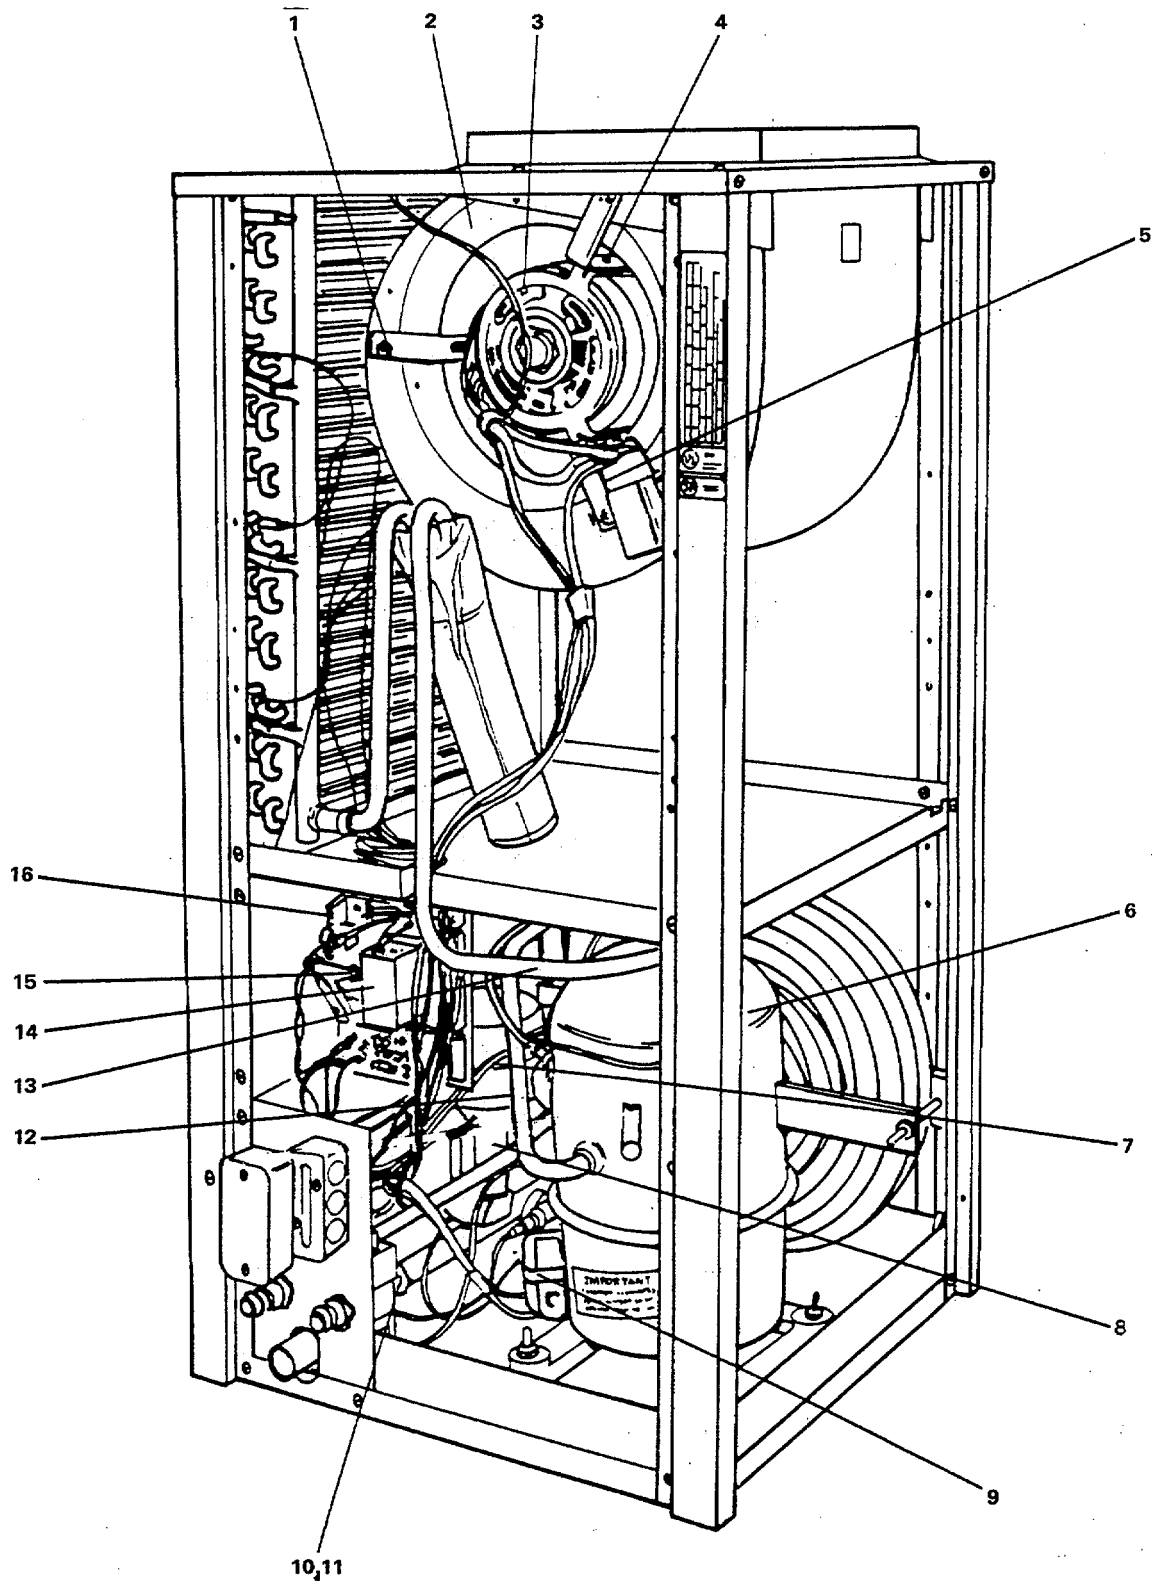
Air Conditioner Components (A/C-1 and 3).
